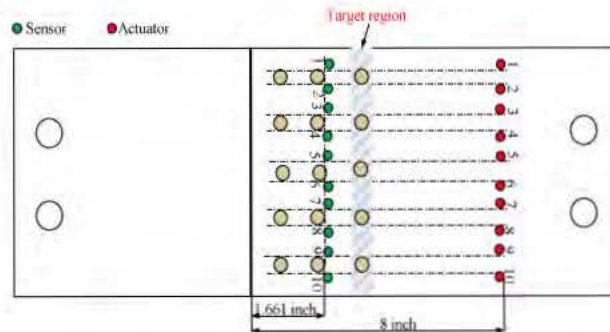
Sensor network layout for damage detection on riveted lap joint
